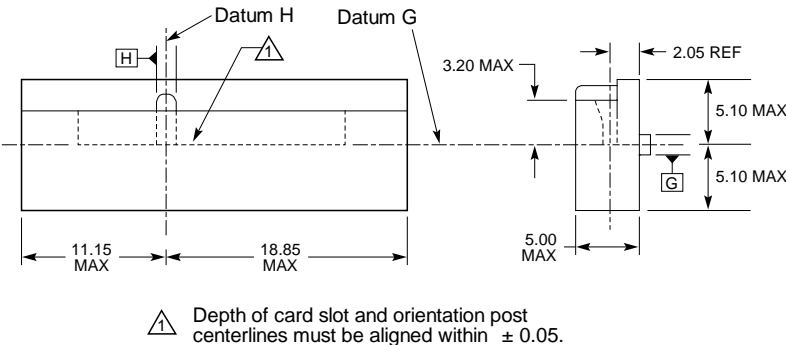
PCI Express Full-Mini and Half-Mini Card System Connector
